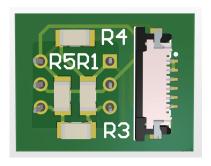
3D2 PCB 4: Buttons Periphery Board
